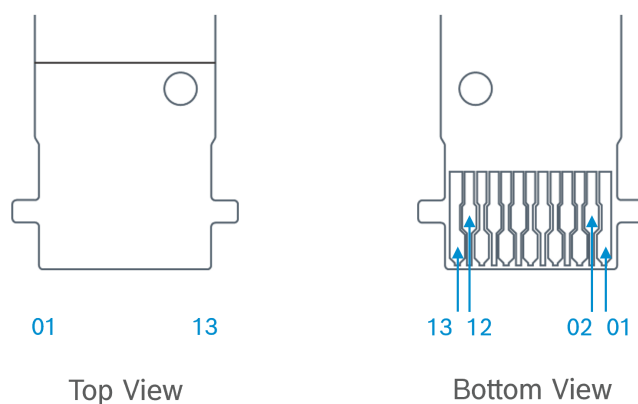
Top view of the bottom metal of the flex PCB showing the connector pins numbering
